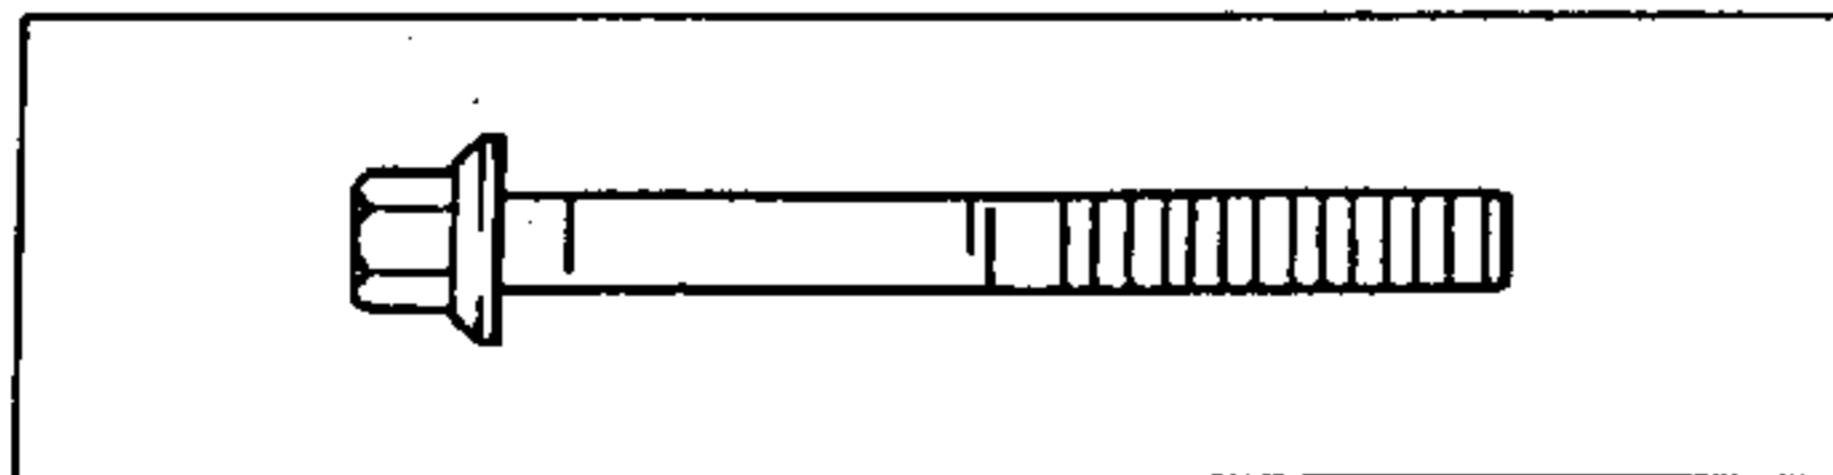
Straight Shank 6mm Type Connecting Rod Bolt.
